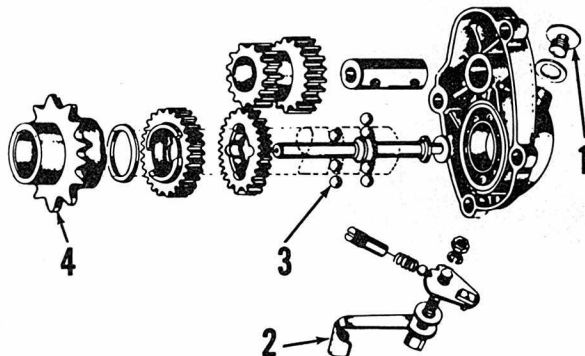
Exploded view of two speed gear box used on late C2TR models.
